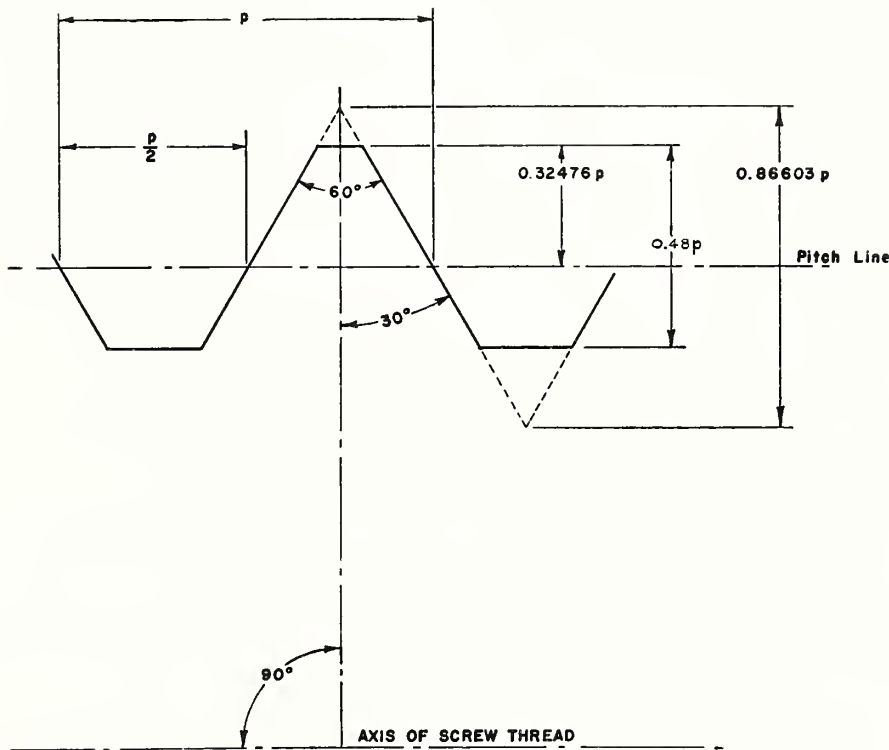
Basic thread form, Unified Miniature threads, UNM.
